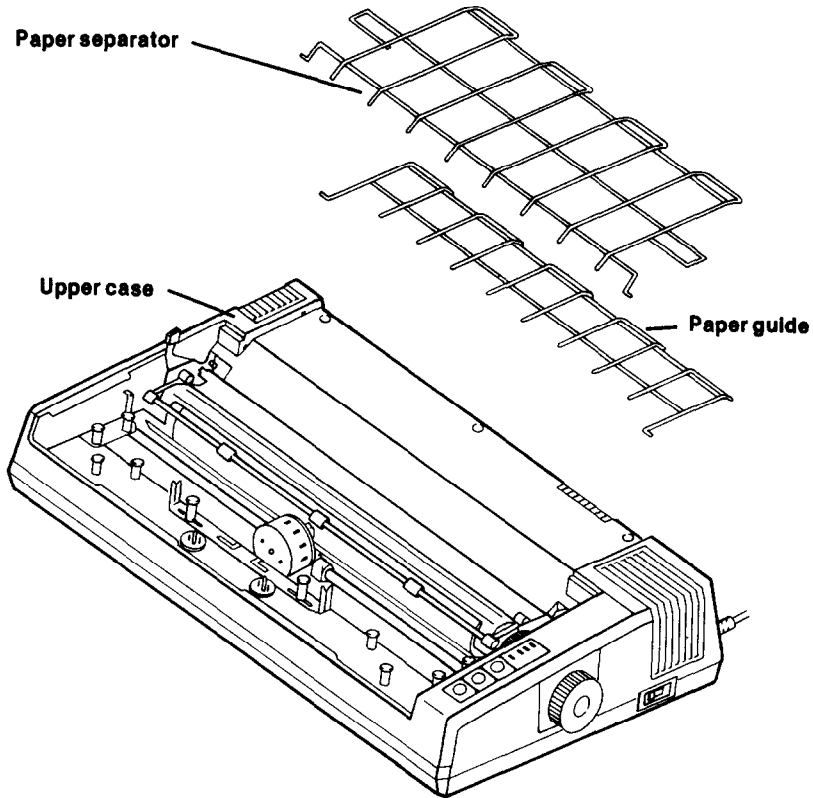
For the Gemini-15X the paper guide and separator are wider because the Gemini-15X is wider than the Gemini-10X. But these accessories attach in the same manner on both printers.
